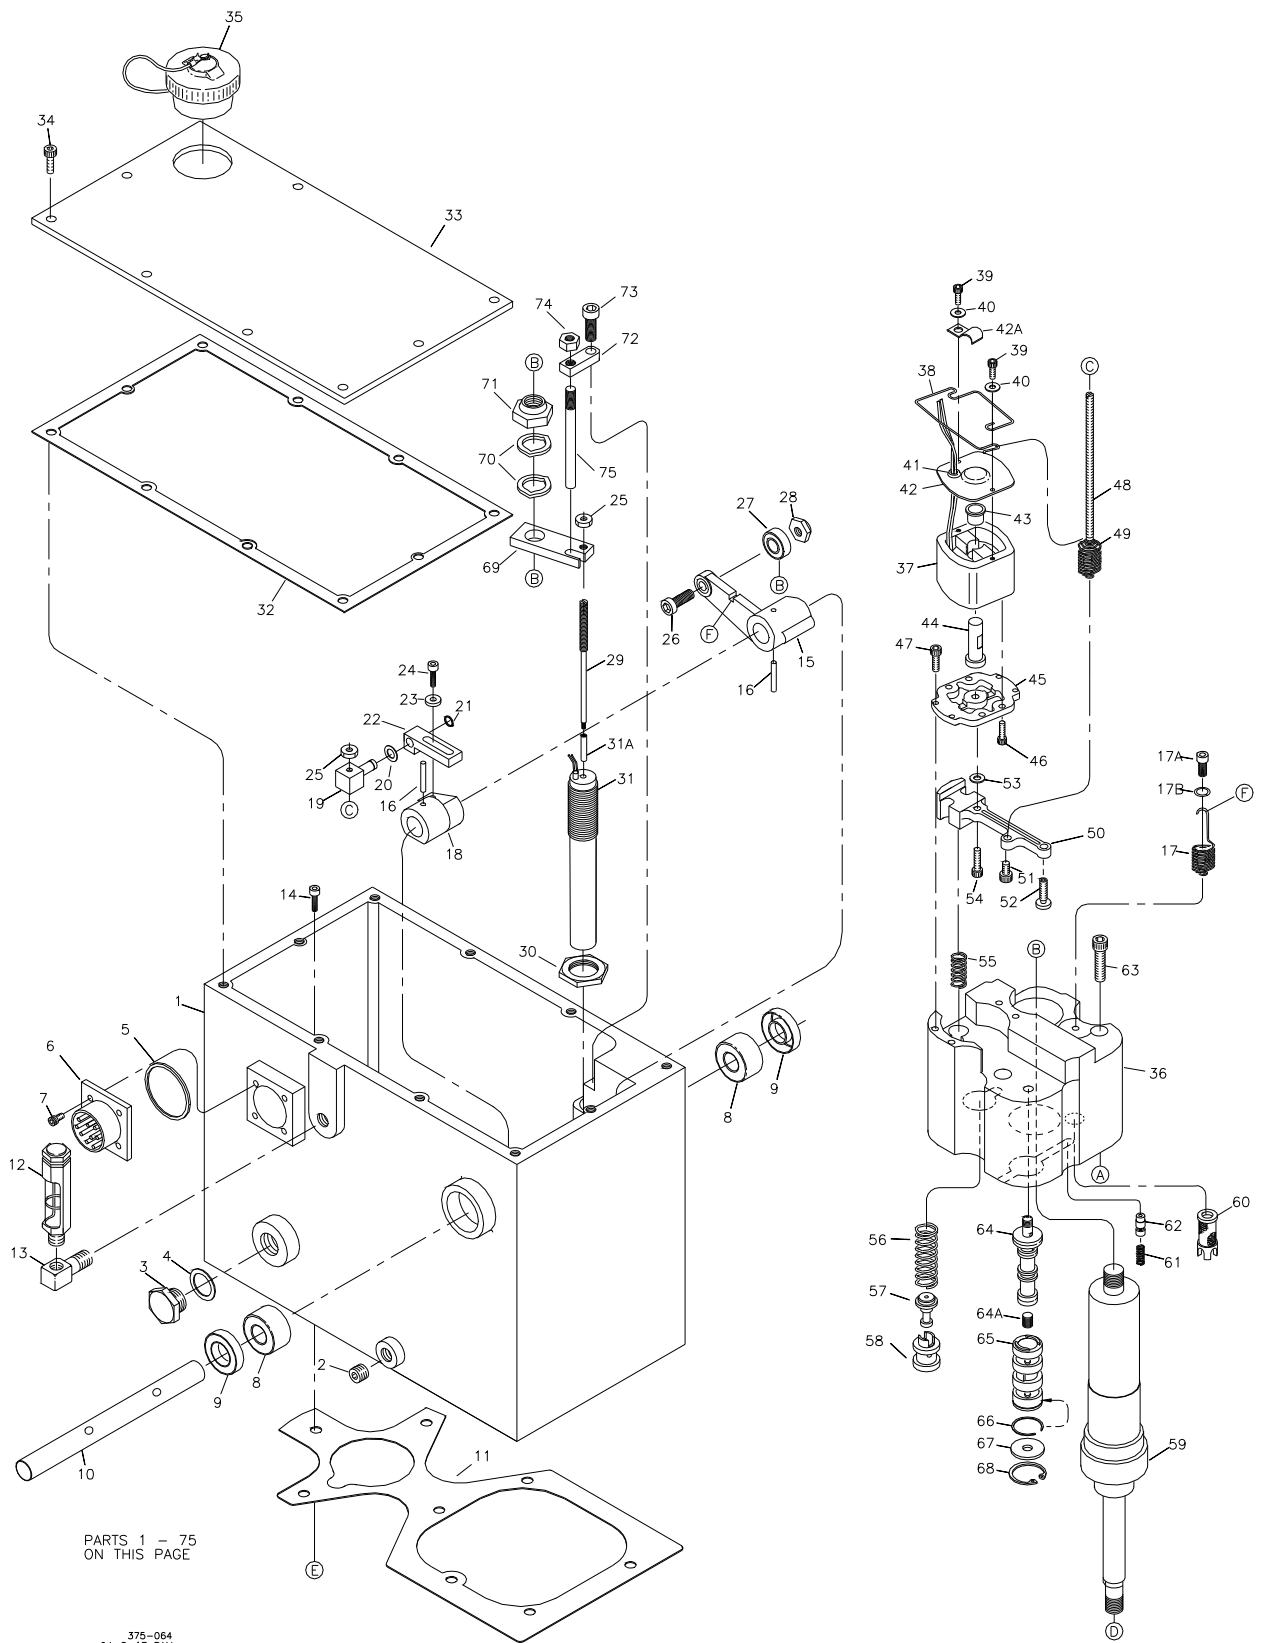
Exploded View of PG Actuator Upper Assembly
